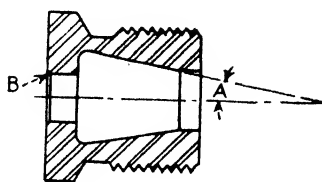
A part of this type can be produced on an automatic screw machine but requires special tooling to form the tapered interior surface. The drawing should show, among other things, the angle A , which the tapered surface makes with the axis, and the chamfer B , if the burr thrown into the hole by the cutoff operation must be removed.
